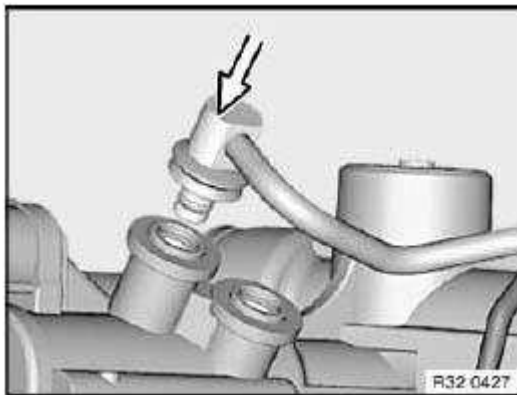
Pressing Quick-Release Coupling Into Steering Gear
